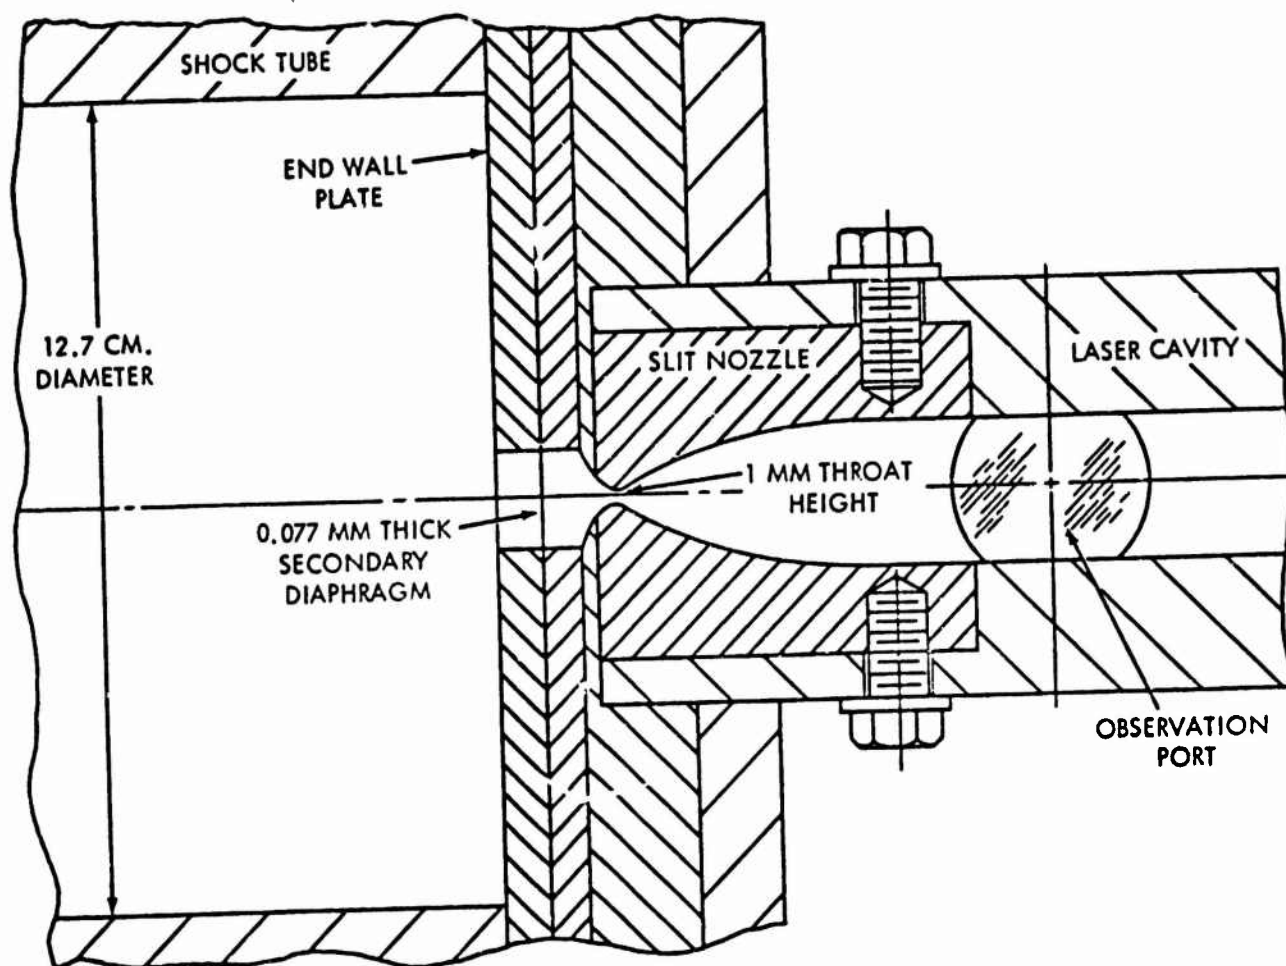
SLIT NOZZLE - LASER CAVITY ARRANGEMENT
